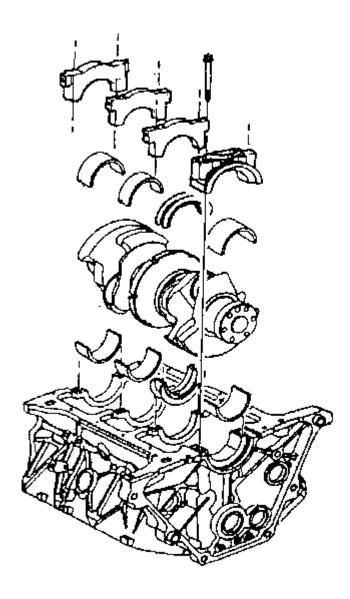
View Of Crankshaft, Main Bearings And Bearing Caps Courtesy of GENERAL MOTORS CORP.
